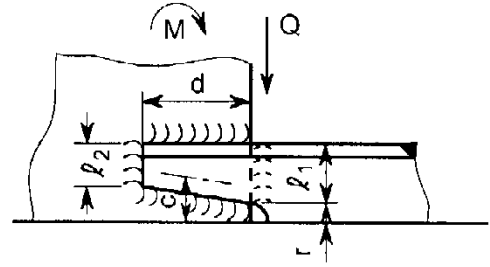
Flank and frontal fillet welds for profile joints
